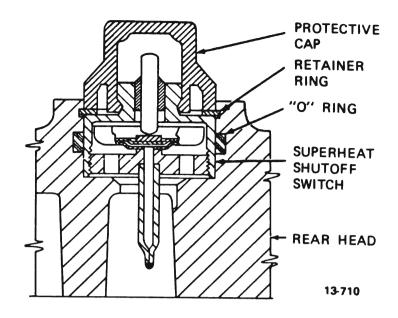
Cross Sectional View - Superheat Shutoff Switch in Rear Head
